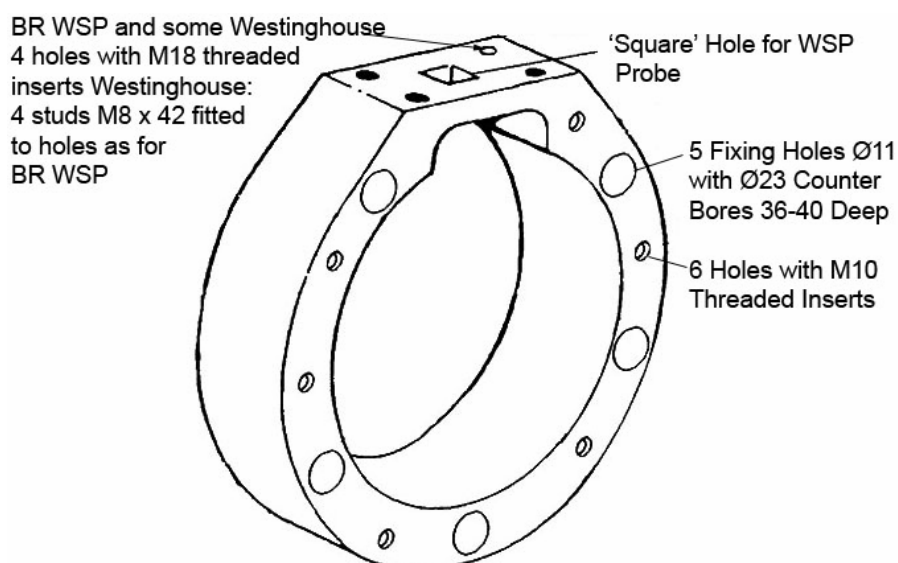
Revised Design – Aluminium to Drawing B1-A0-9001022
